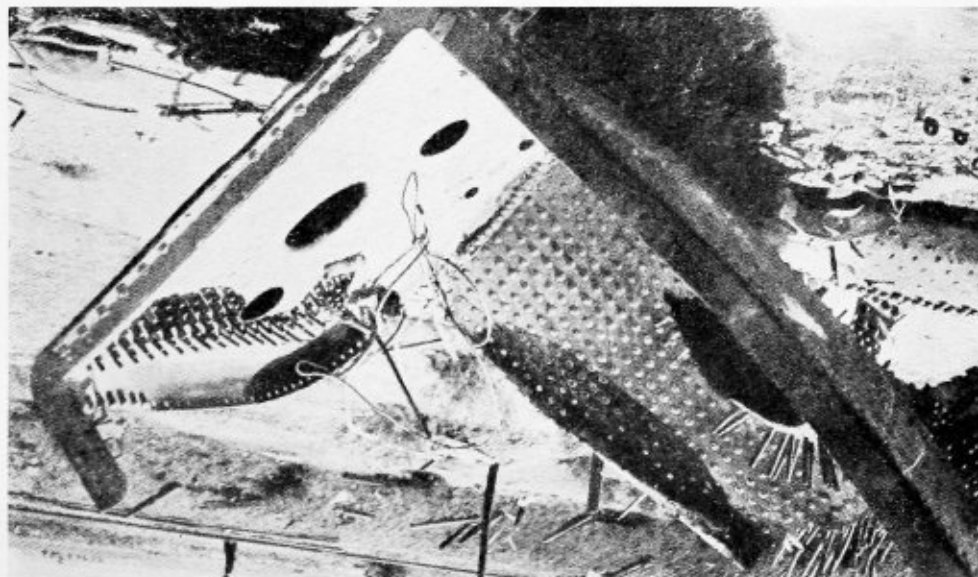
Inside view of the back end of the boiler, with the left side and part of the door sheet blown off
